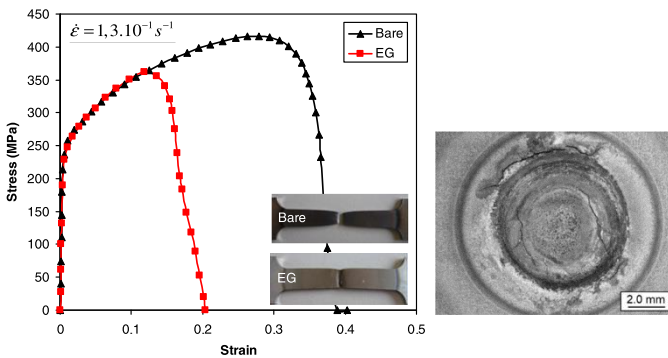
Left: Tensile curves of bare and electrogalvanized (EG) TWIP steel specimens at 700°C [1] Right: Spot weld with surface cracks due to LME [2]
